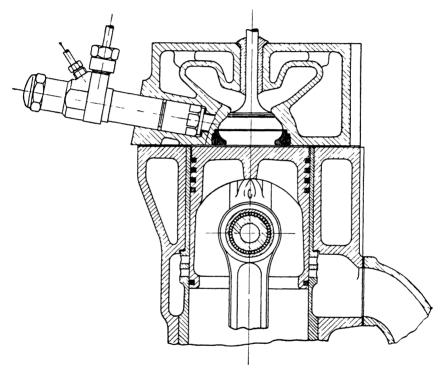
Combustion chamber of two-cycle C.I. engine
